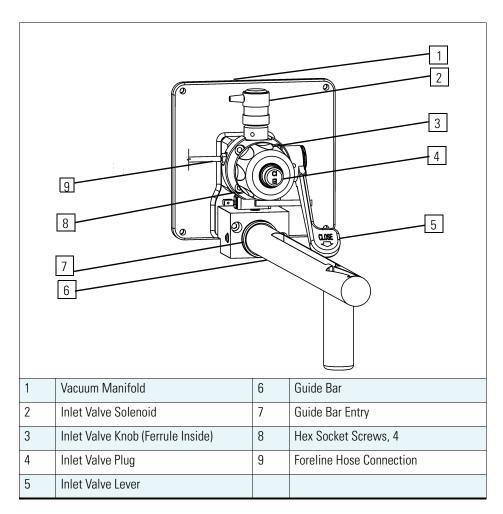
Inlet Valve Components (I/R Tool Not Shown)
